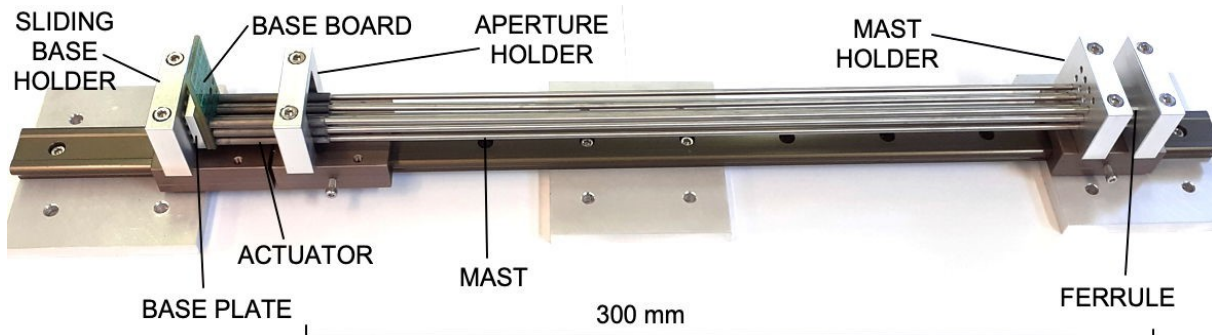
DFPS-A16 Cell Assembly Fixture. Here we see stainless steel masts, later rejected in favor of carbon fiber. We will use a similar fixture to glue the DFPS-A80 masts to their actuators.
